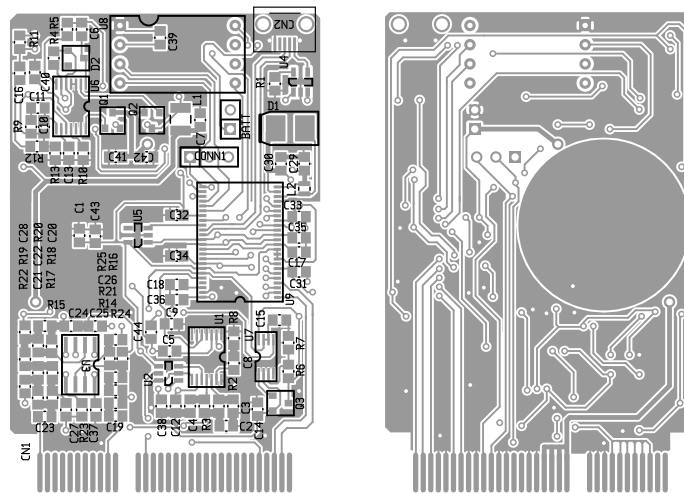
PCB Layout for analogue interface board. Shown in actual size.
